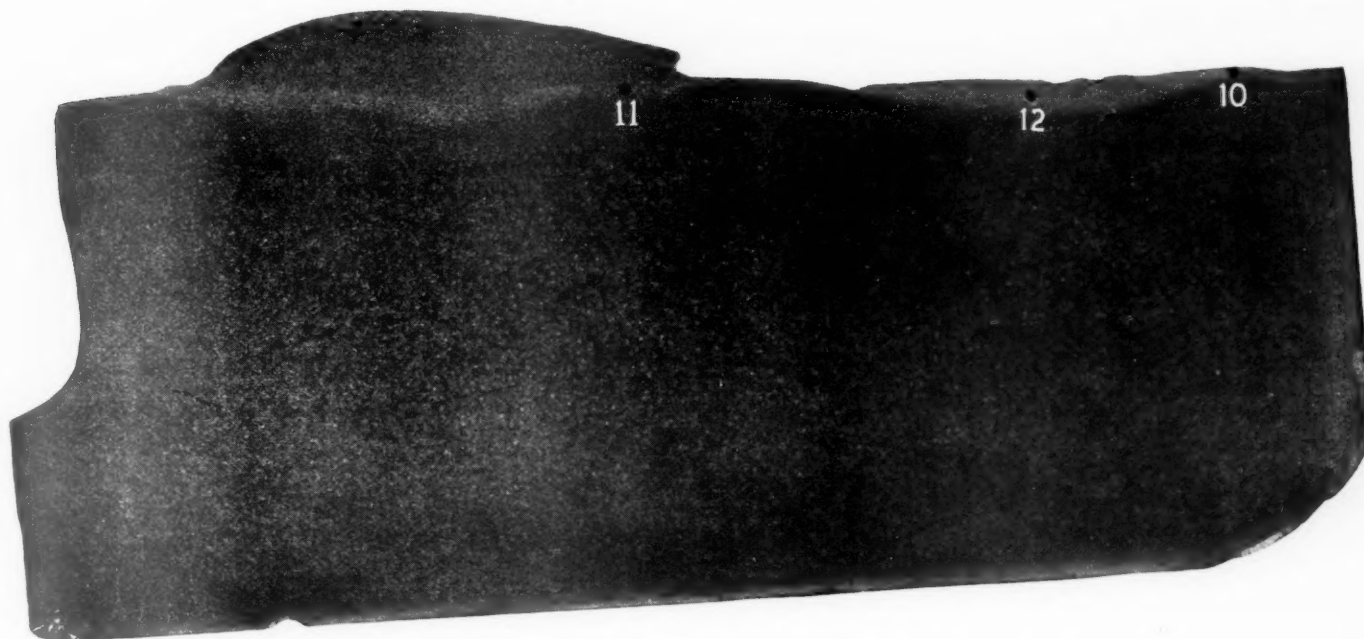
Structure of Test Piece After Being Heated to the Melting Point—3.5 Diameter
